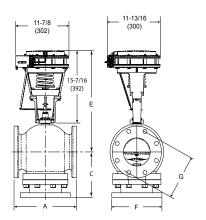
MK-6911 with Flanged 3-Way Globe Valves
